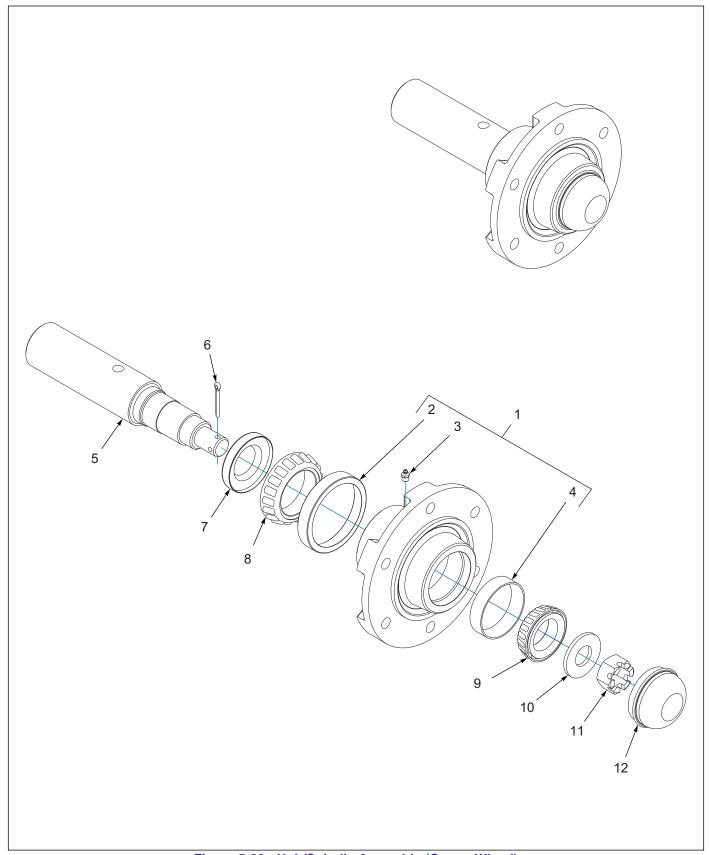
Hub/Spindle Assembly (Gauge Wheel)
